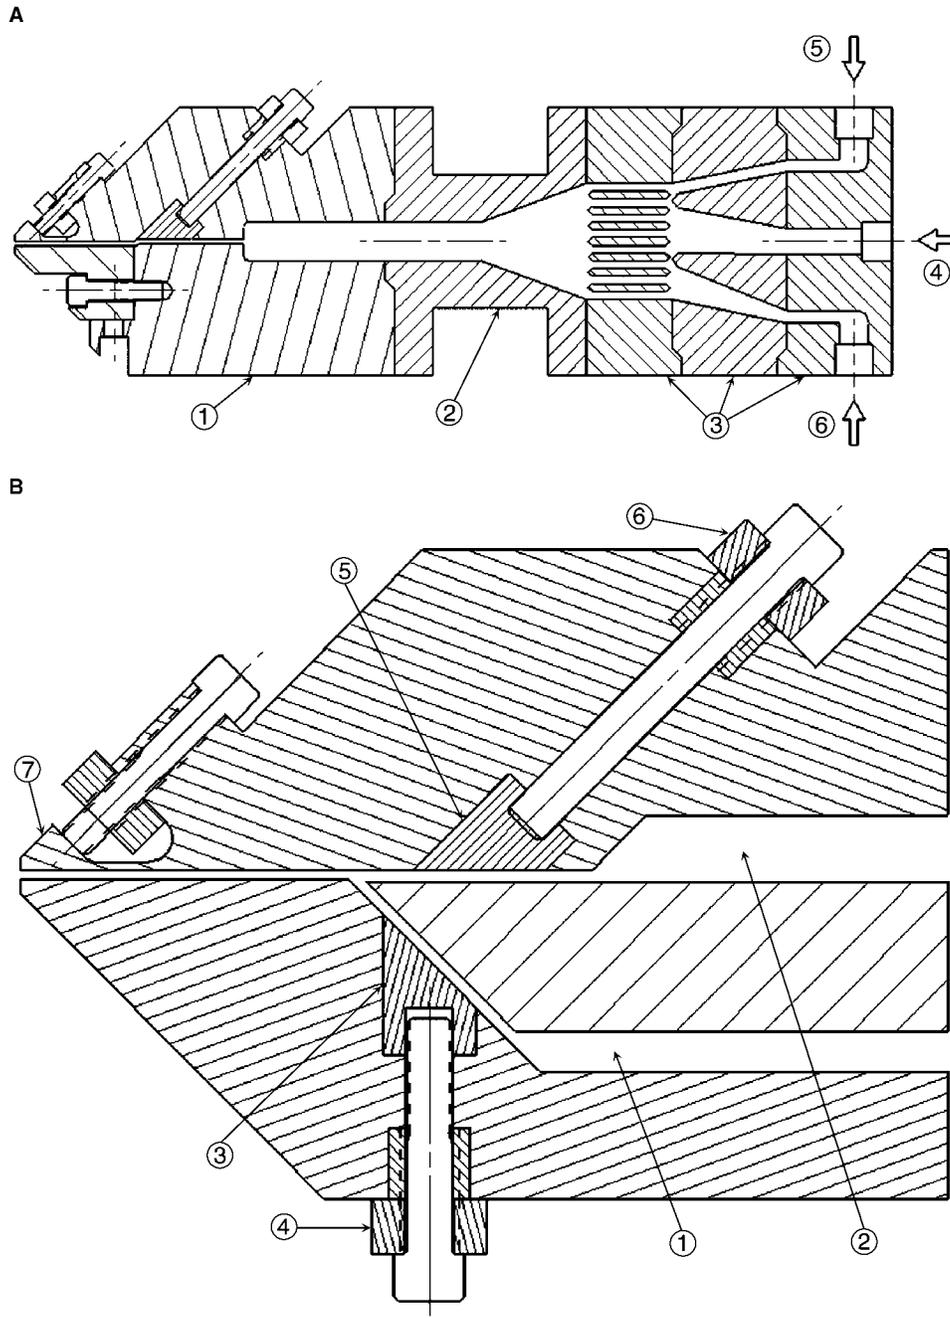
Coextrusion feed block manifold and sheet die (A): (1) sheet die with flow restriction; (2) adapter plate; (3) feed block assembly; (4) core material layer inlet; (5) upper material layer inlet; (6) lower material layer inlet; and coextrusion multimanifold sheet die (B): (1) lower melt channel; (2) upper melt channel; (3) lower choker bar; (4) lower choker bar adjustment bolt; (5) upper choker bar; (6) upper choker bar adjustment bolt; (7) flex lip.
